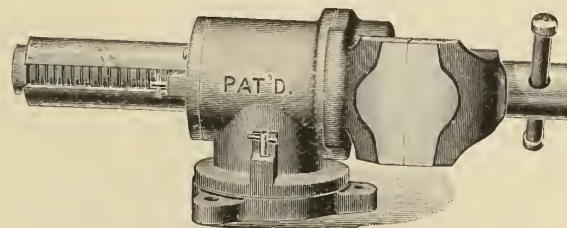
Double Swivel Vise. Reed Tool Co., Erie, Pa.
